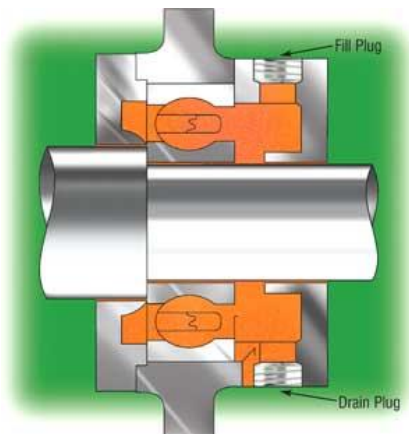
Same-side fill and drain – used with open, single-shielded, and double-shielded bearings.
